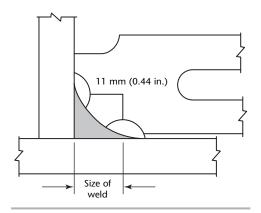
Gage to determine fillet weld concavity.
